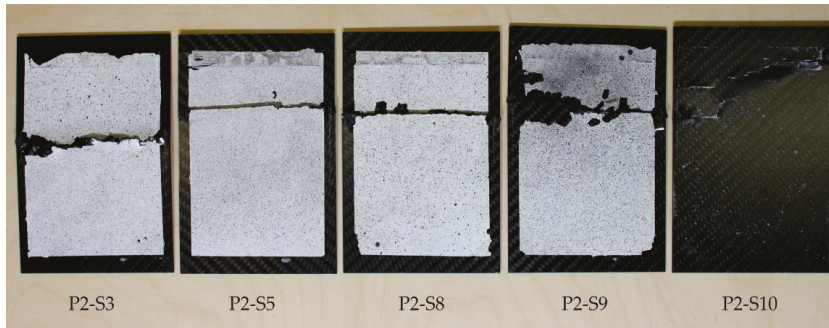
Front side of tested specimens P2-S3, P2-S5, P2-S8, P2-S9 and P2-S10 using CAI-modified device.
